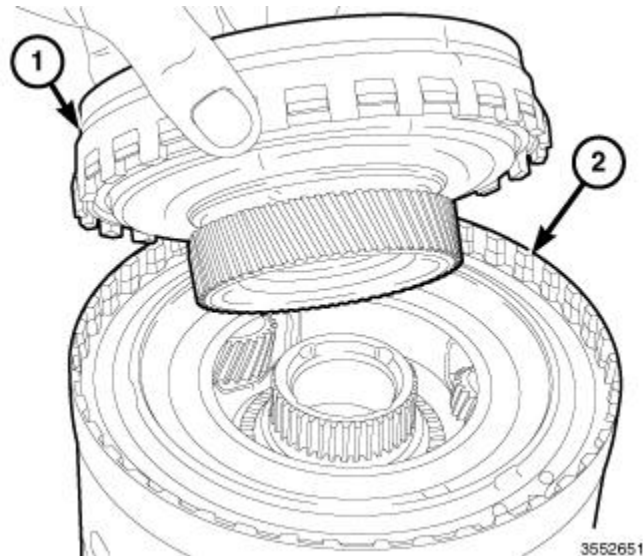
P2 Annulus/P3 Sun Gear & Drum Assembly
